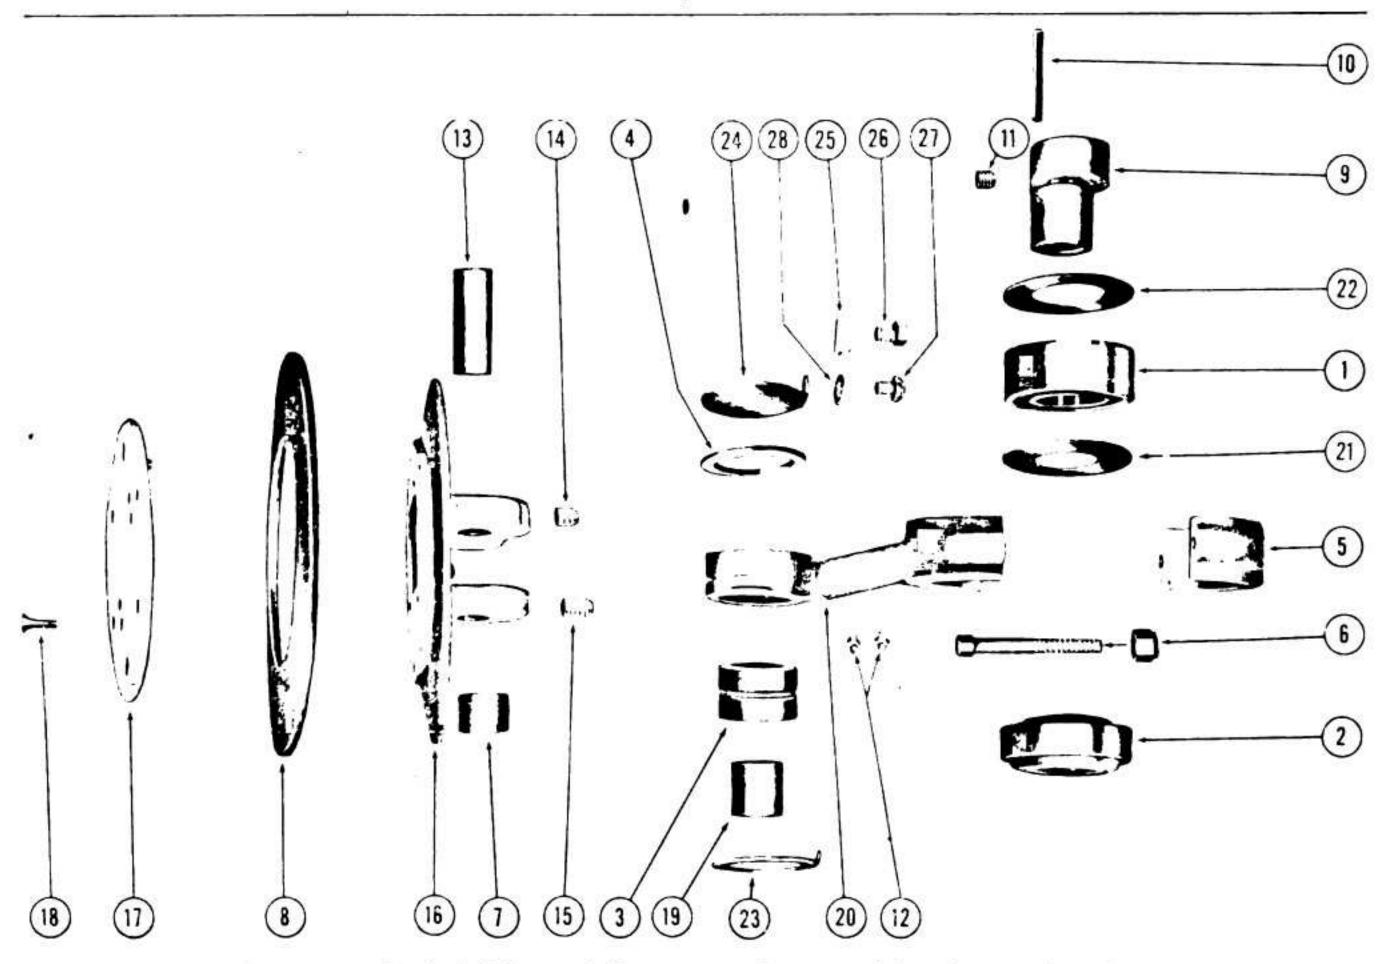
Exploded View of Compressor Piston and Diaphragm Assembly
